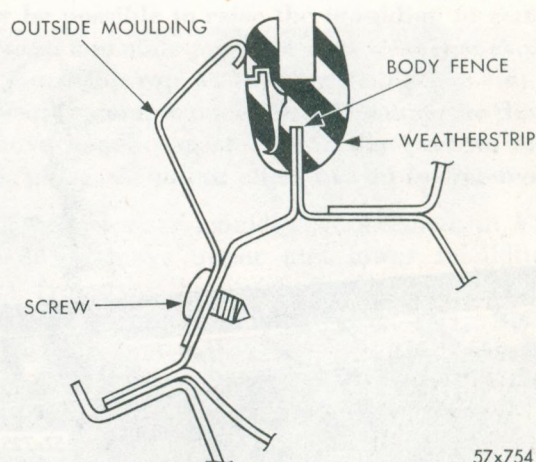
Windshield Weatherstrip and Moulding—Lower
